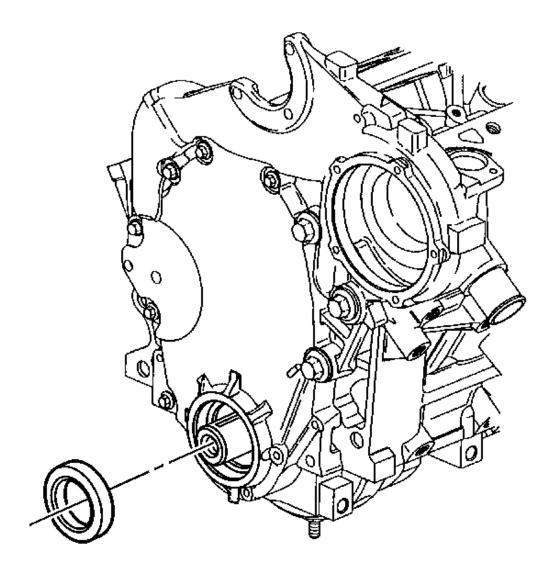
Removing Crankshaft Front Oil Seal Courtesy of GENERAL MOTORS CORP.
